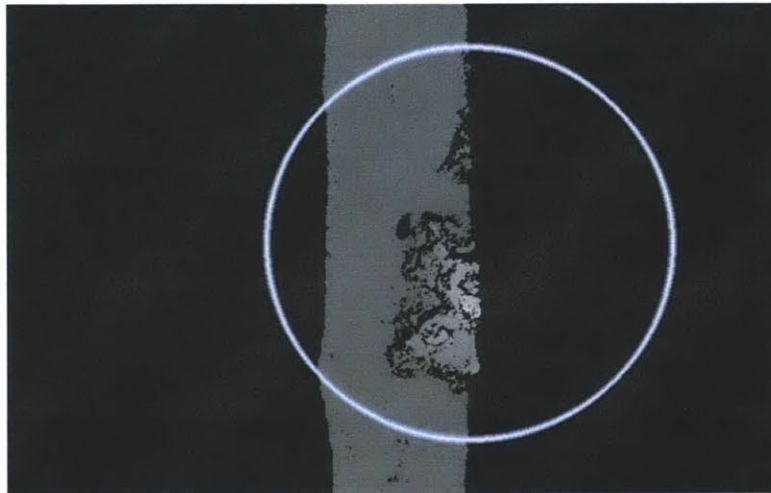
Interferometer Scan of Micro machined Tool with Defect
